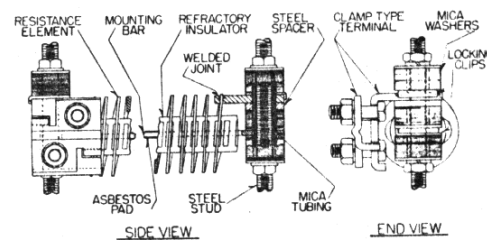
Terminal Mounting for a Type WM Resistor Unit (Dwg. 5-C-2683)
